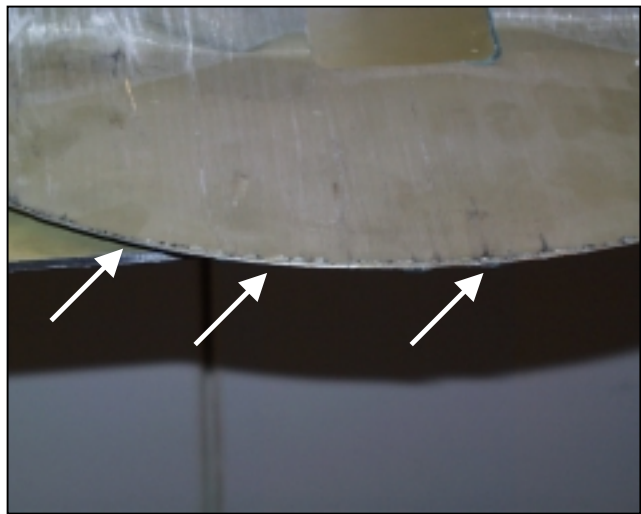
Multiple fatigue cracks in upper skin sheet
